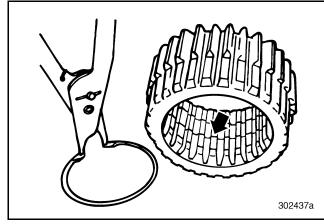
Removing Snap Ring from Gear (T313L21/T318L21 Shown)
